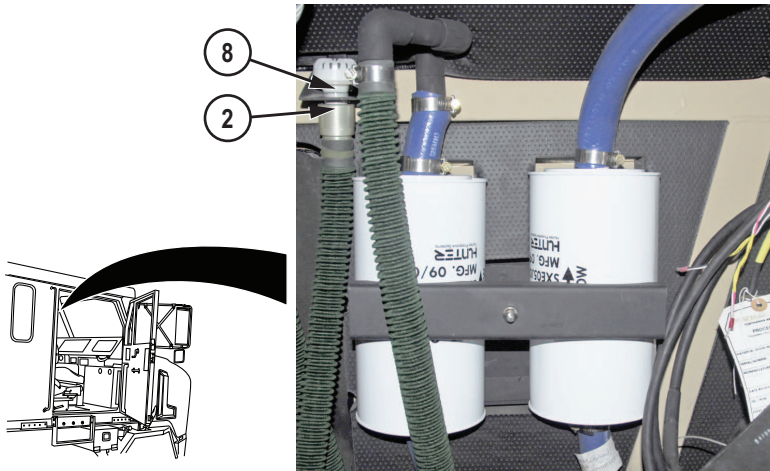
Gas Particulate Filter Hose Removal and Stowage.
